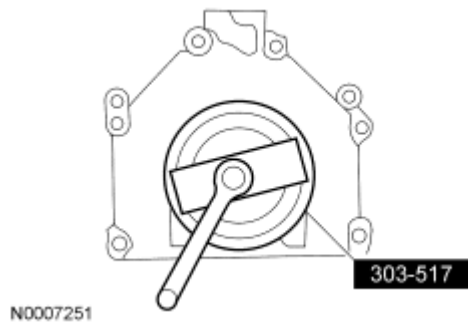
Installing Crankshaft Rear Oil Slinger Using Special Tool (303-517)
